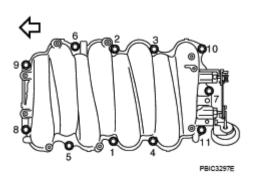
Identifying Intake Manifold (Upper) Mounting Bolts Tightening Sequence
